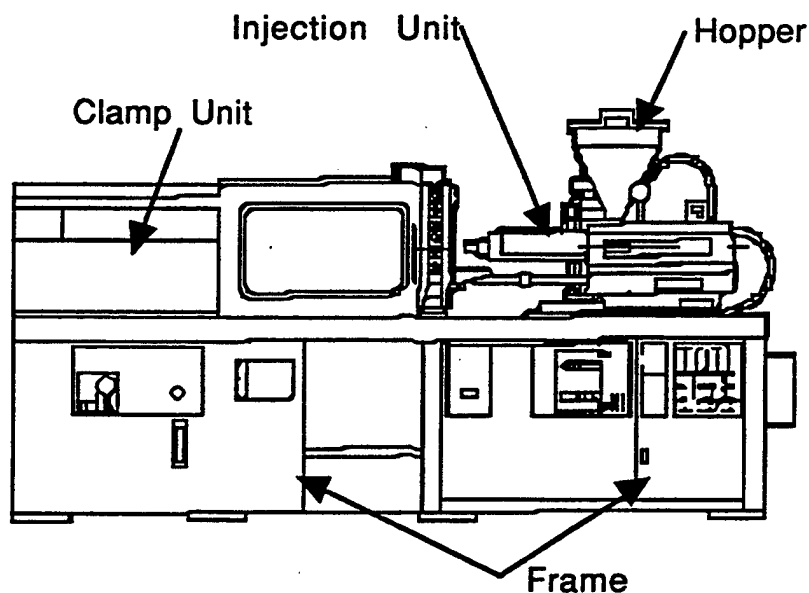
Generalized Diagram of an Injection-Molding Machine.
